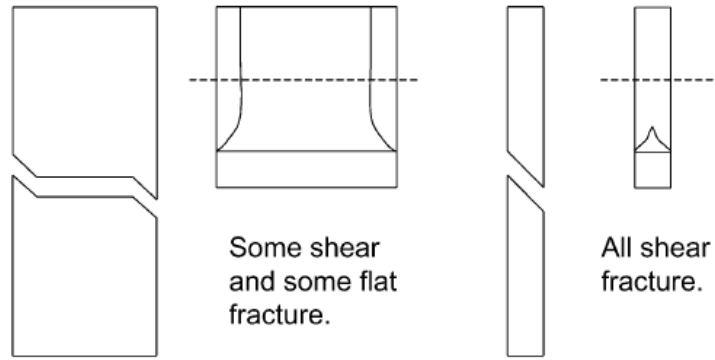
Schematic differences in fracture appearance of standard size and sub-size Charpy-V specimens [60]
